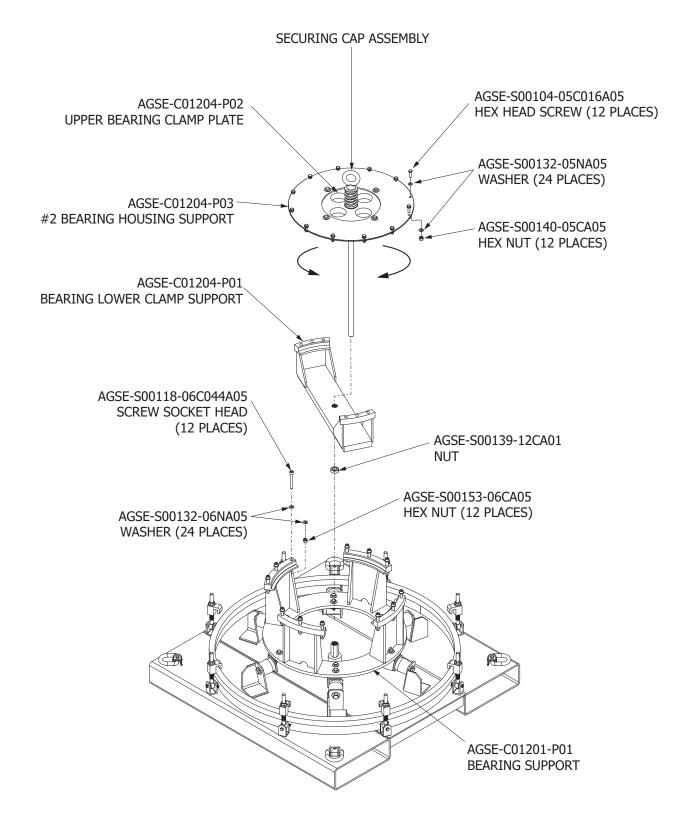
Bearing Cap Plate Support and Securing Cap Removal
